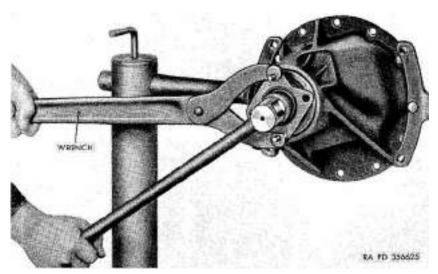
Holding companion flange with wrench 41-W-3277-40.
